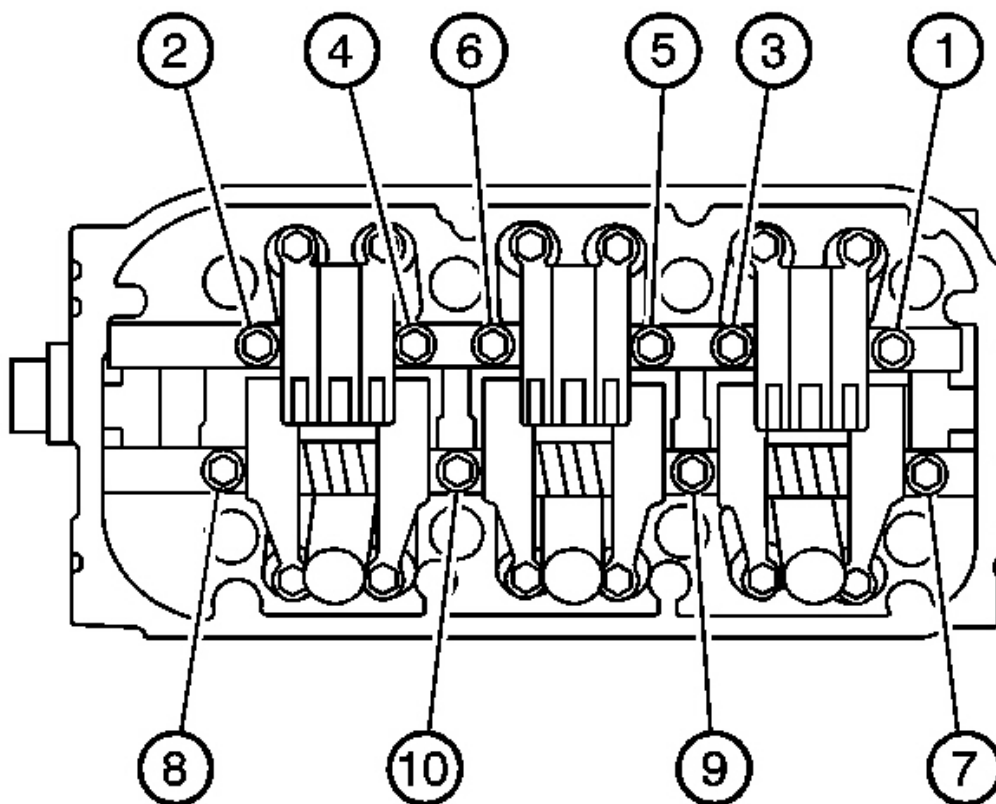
Identifying Rocker Shaft Retaining Bolts
